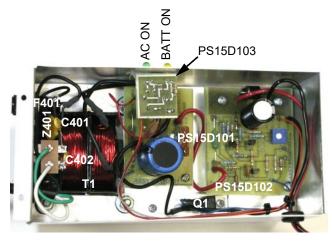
PS-15D-1 view inside chassis. Chassis formed from 0.040 5052-H32 sheet aluminum on shop brake. Bud or other manufacturer's chassis can be substituted.
